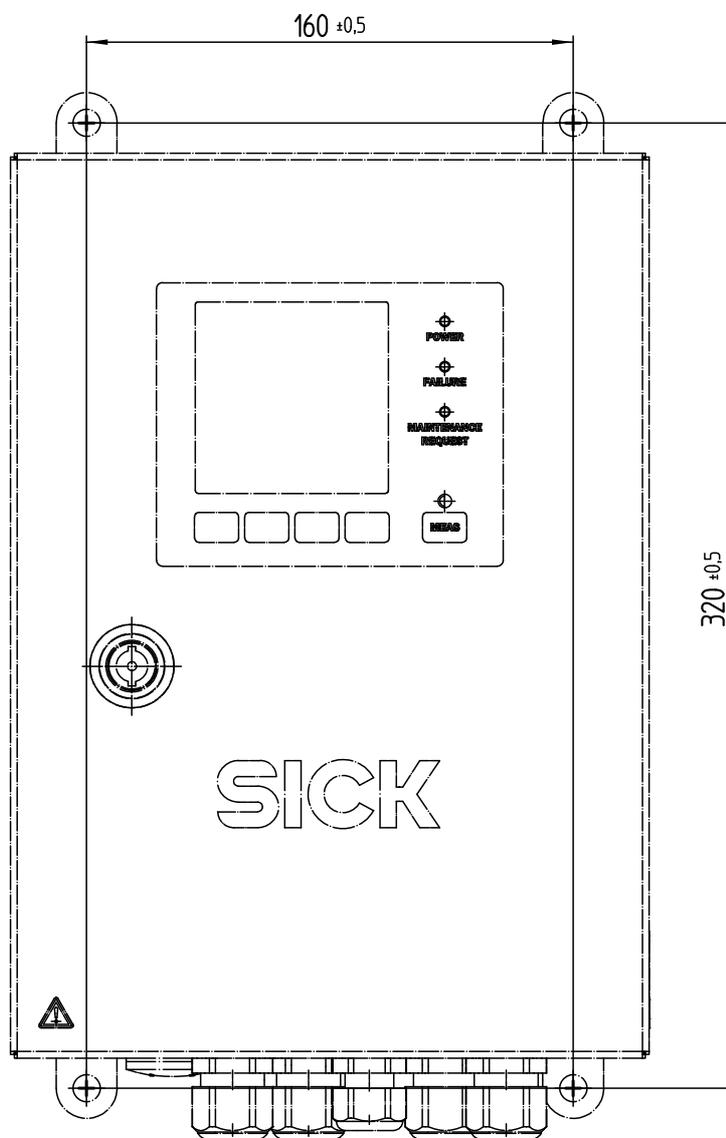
Drilling plan VISIC50SF (all units of measurement in mm)
